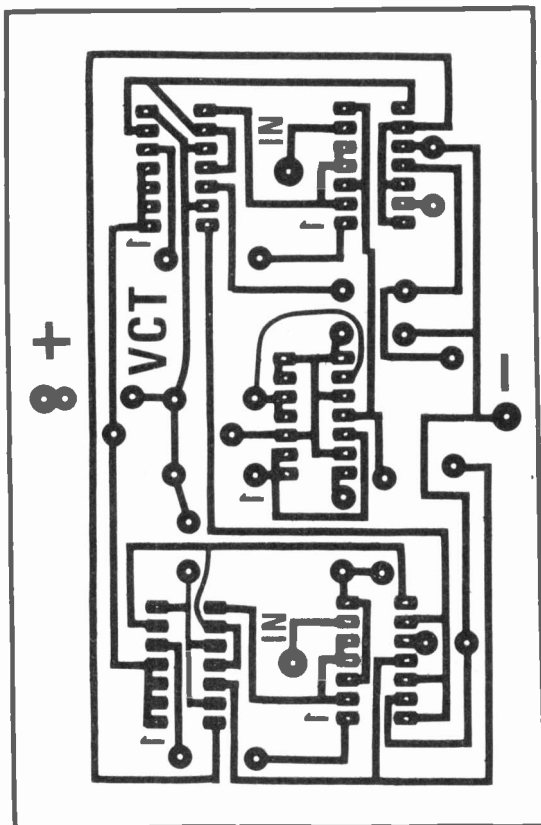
PCB layout, showing external components, wire links, etc. — view from component side.
